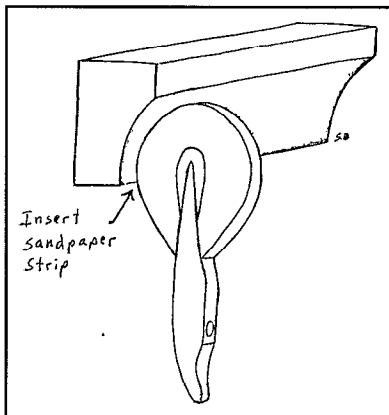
Sandpaper strip is forced against hammer shoulder by coved molding.
